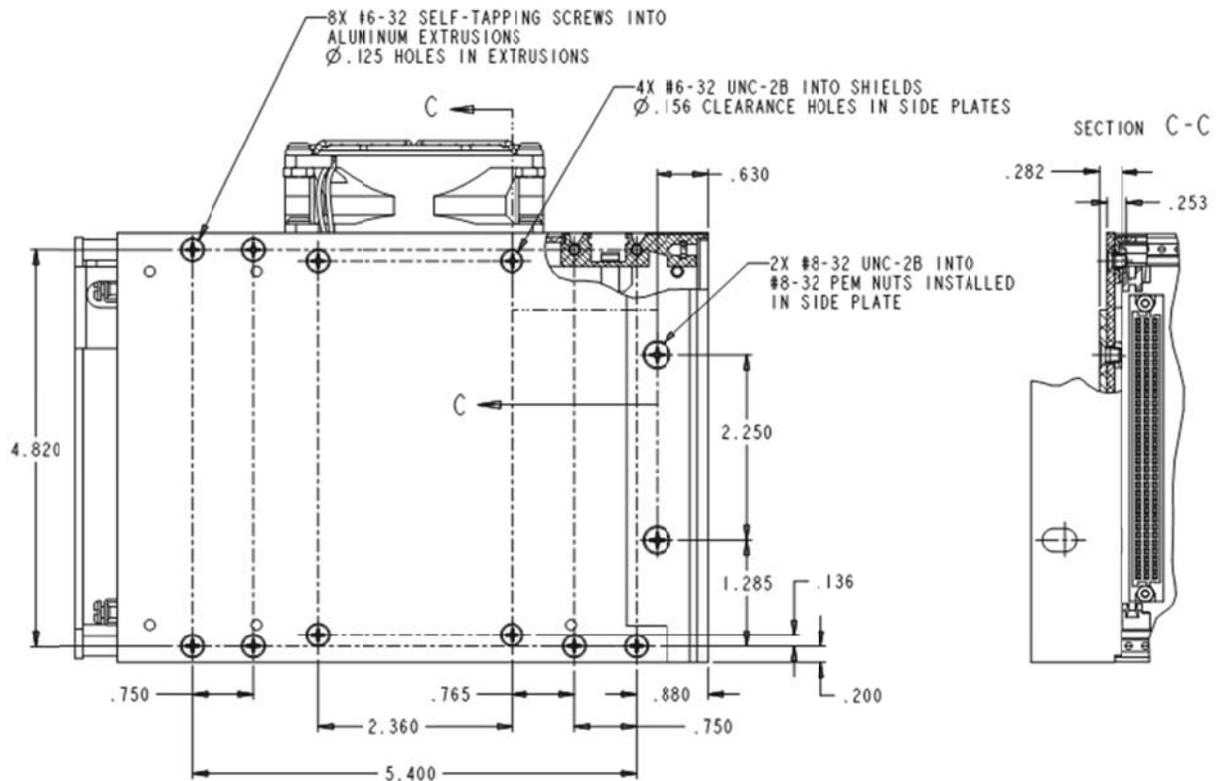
Side View of Typical Model 903 Console Card Cage
